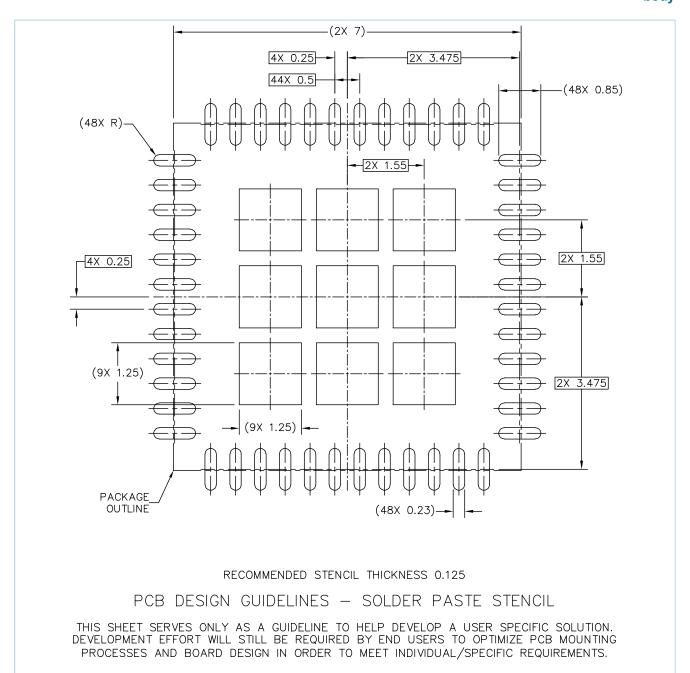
Reflow soldering footprint part2 for HVQFN48 (SOT619-1)
